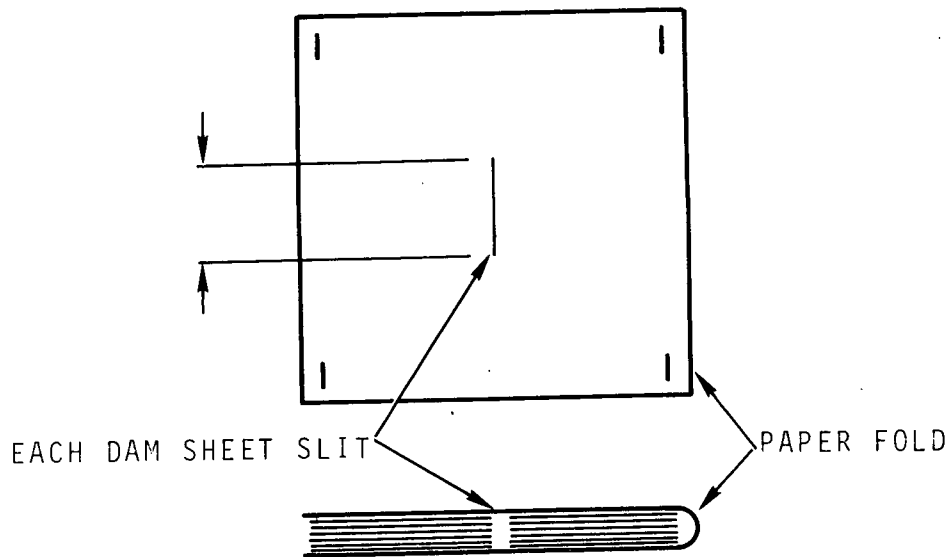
Composition of One Five-Sheet Double-Aluminized Mylar (DAM) Pad
